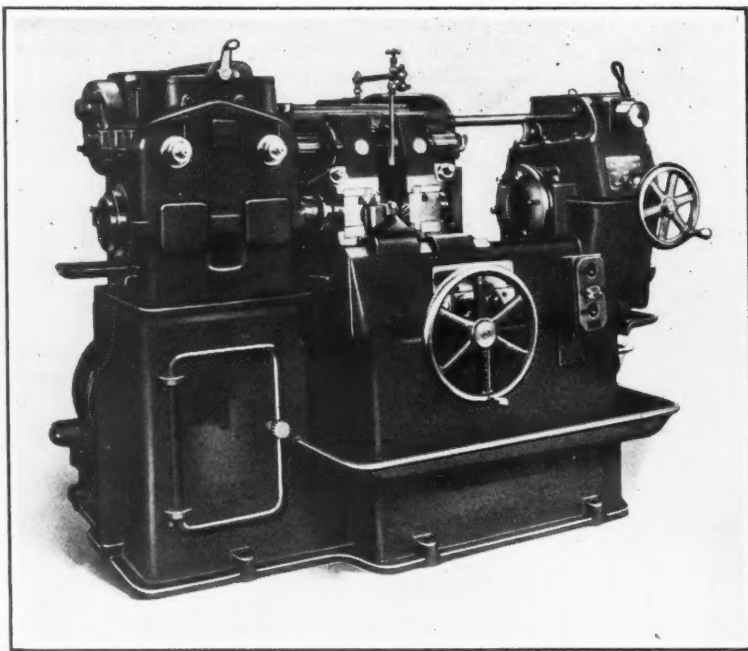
Sykes Gear Generator which Makes 850 Strokes per Minute
